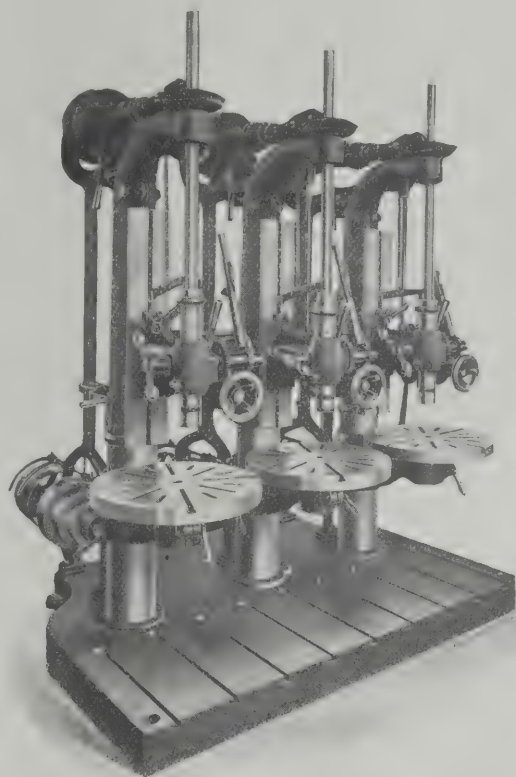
Twenty-six inch, Three-spindle Gang Drill
